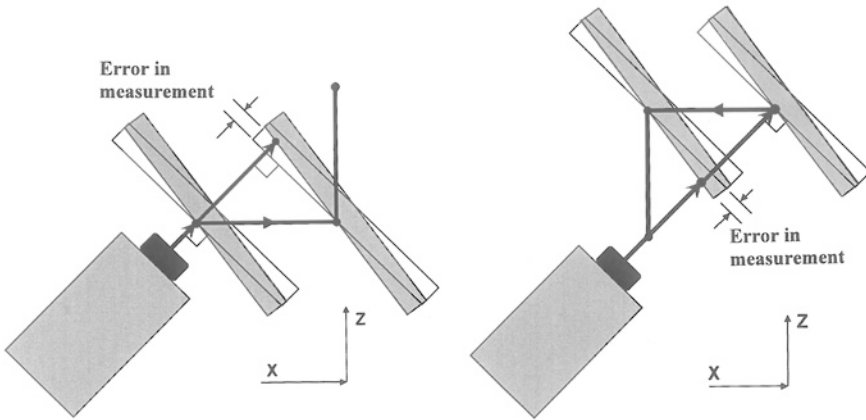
Typical laser diagonal tests for orthogonal machine tools (courtesy of Renishaw plc)
